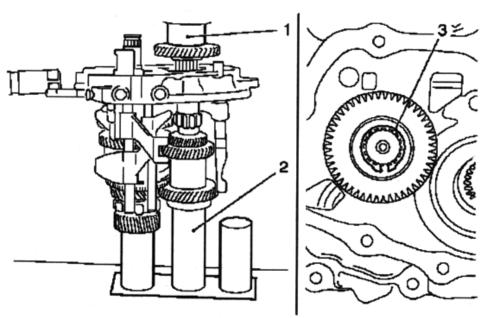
Press-fit dentate wheel 5 - th transfer: 1 - a special tool, 2 - a special tool;
